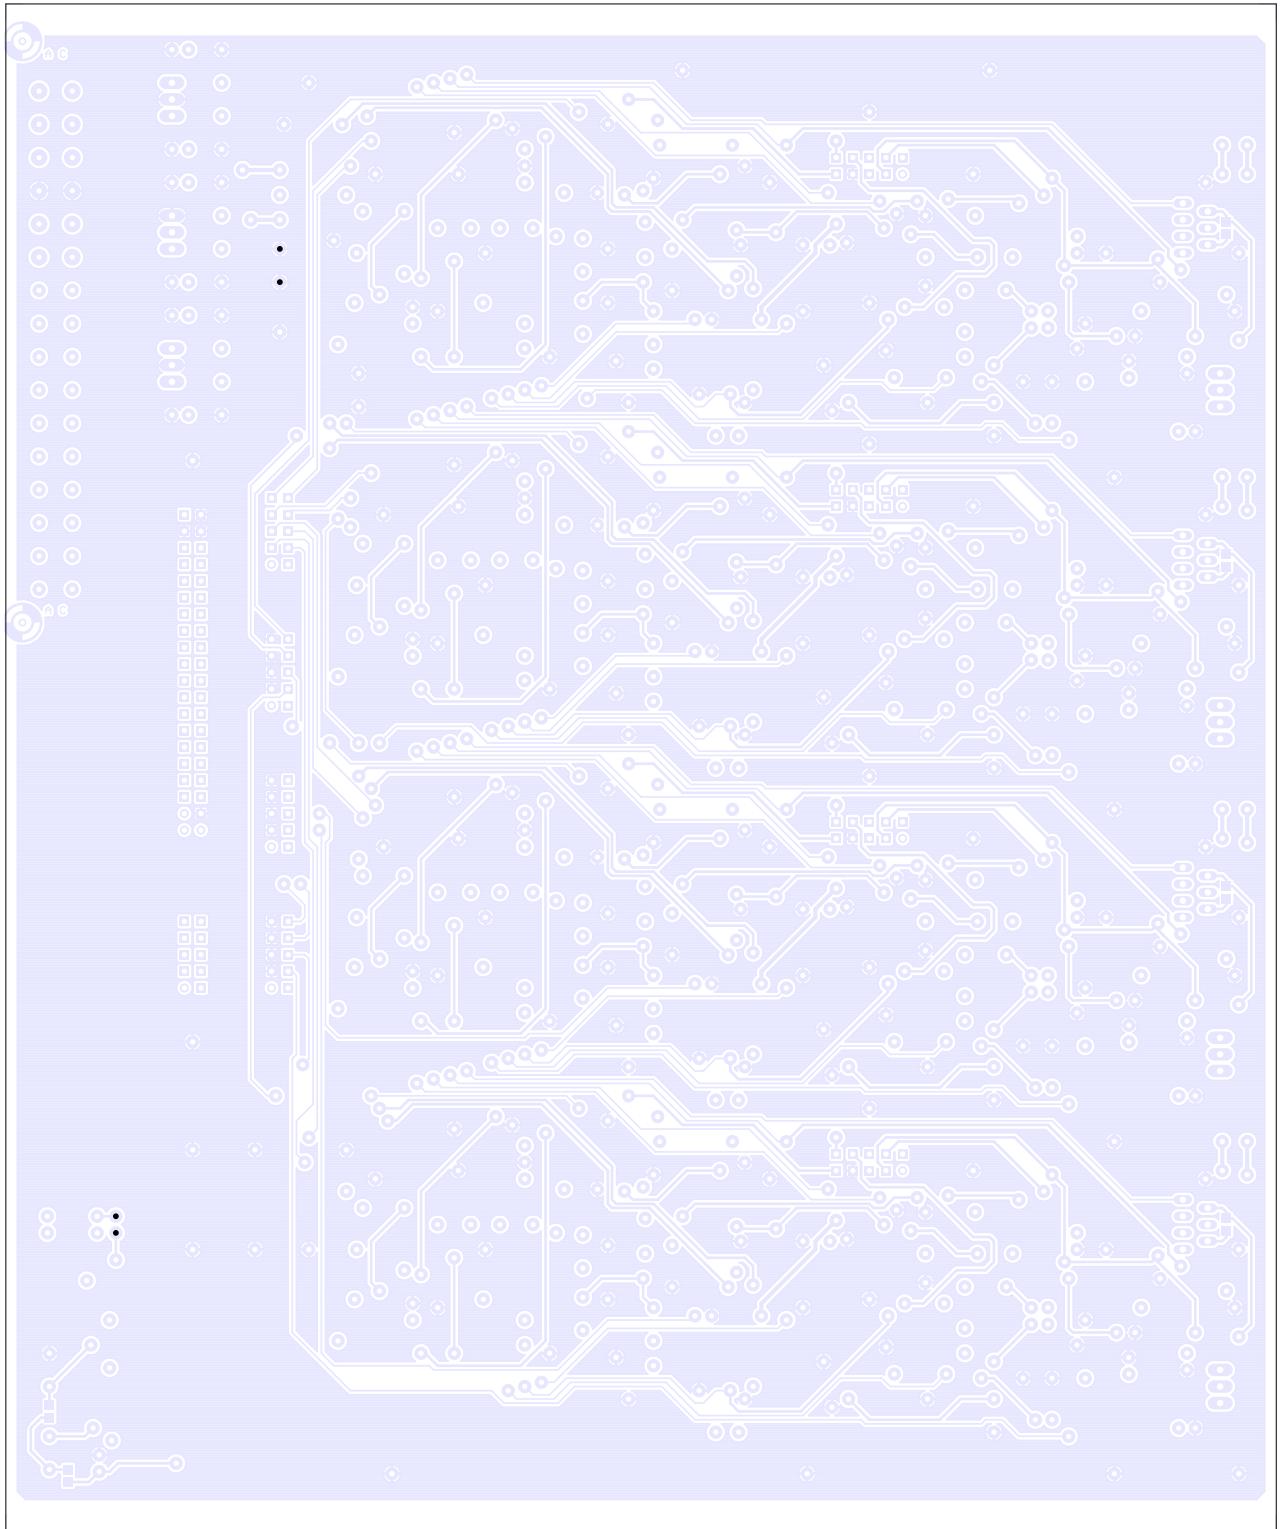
Board bottom view showing drills with 0.9 mm (0.035 in) diameter
